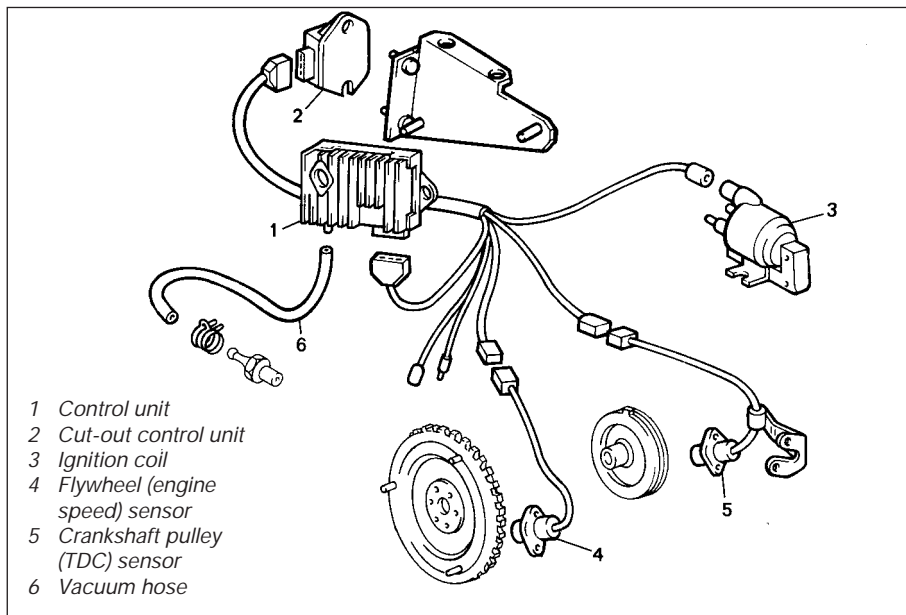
Main components of Digiplex ignition system (Sec 9)
